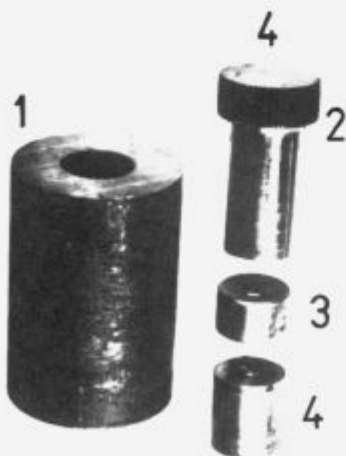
Press mould for pressing and calibration of specimens for plastometric tests: 1 - body; 2 - upper die; 3 - calibrating matrix; 4 - lower die.
